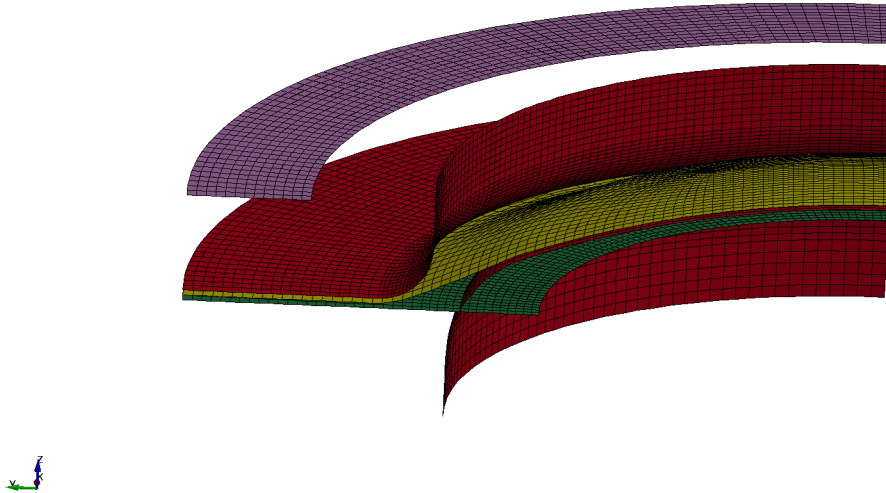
The second forming step, where the red part is the die 4, yellow: the blank, Green: Blank Holder, Red is Punch 3, and purple is the blank holder 2.
